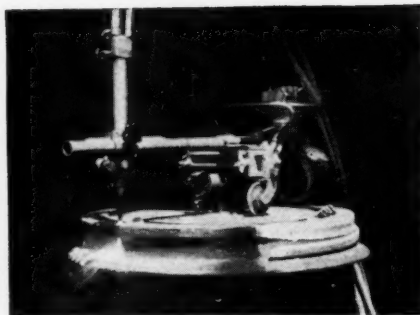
First the false flange is removed (Cut No. 1, Fig. 1).
